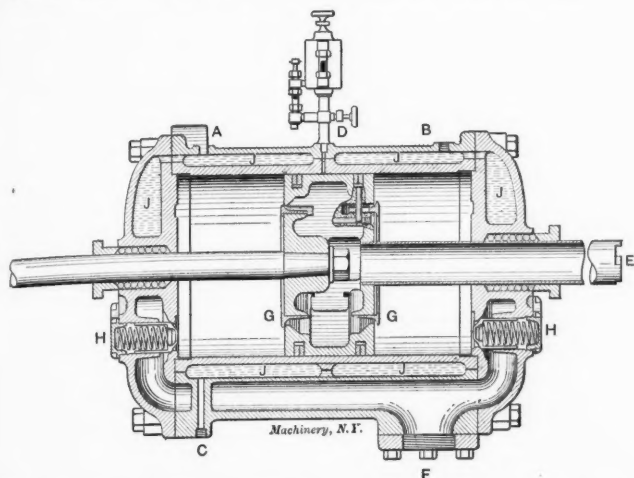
SECTION OF INGERSOLL-SERGEANT COMPRESSOR CYLINDER.
